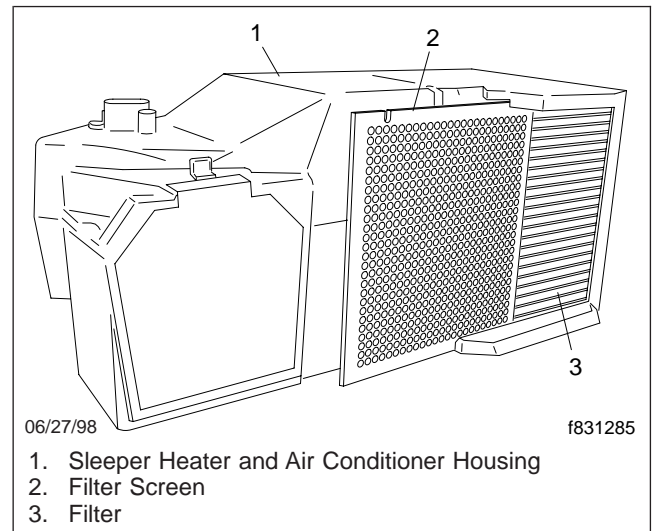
, Sleeper Heater and Air Conditioner Housing With Recirculation Filter
